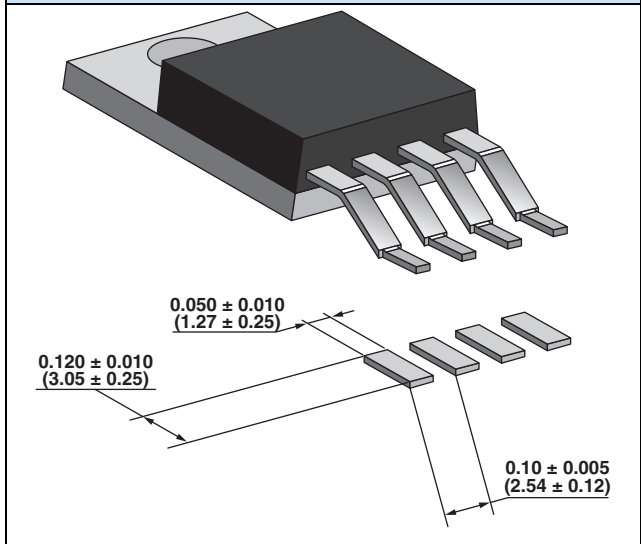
VPR221S DIMENSIONS in inches (millimeters)
